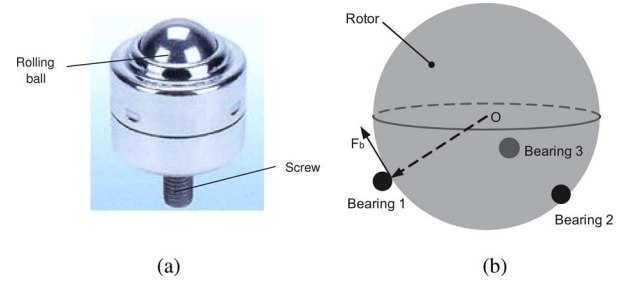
Support spherical rotor with transfer bearings. (a) Transfer bearing [20]. (b) Rotor support.
